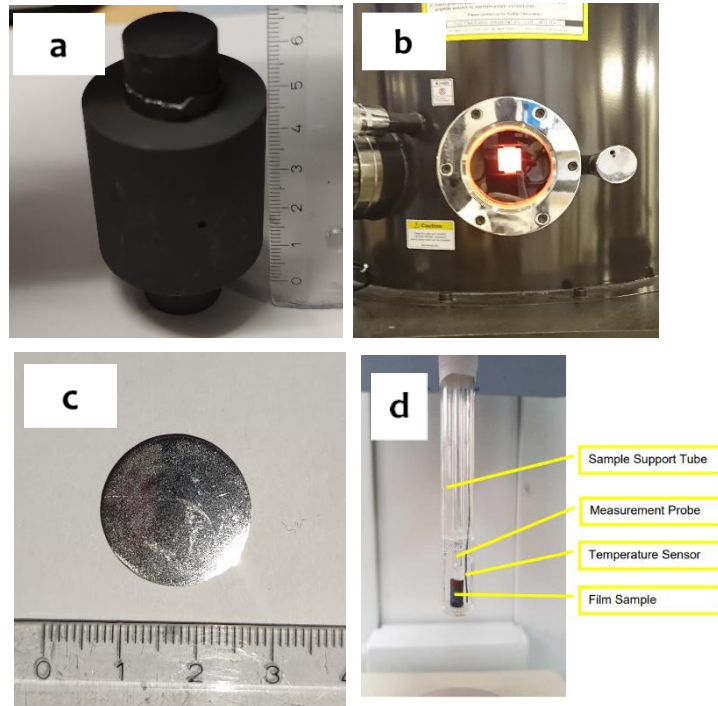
Photography images showing the powder being pressed in between the upper and lower punches, (b) the graphite mould radiating heat during the SPS process, (c) the sintered sample, (d) cylindrical sample prepared for dilatometry.
